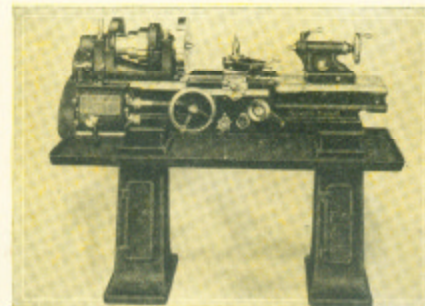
11-inch Lathe Fitted with Cabinet Legs and Oil Pan.
